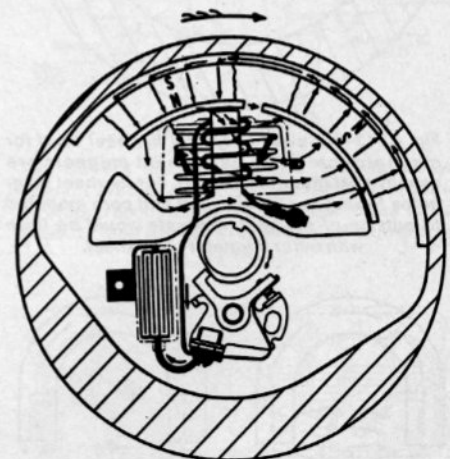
The flywheel magnets have now turned slightly past position shown in Fig. CS21 and rate of movement of lines of magnetic force cutting through coil windings is at maximum. At this instant, the breaker points are opened by the cam and flow of current in primary circuit is being absorbed by the condenser, bringing flow of current to a quick, controlled stop. Refer now to Fig. CS23.
